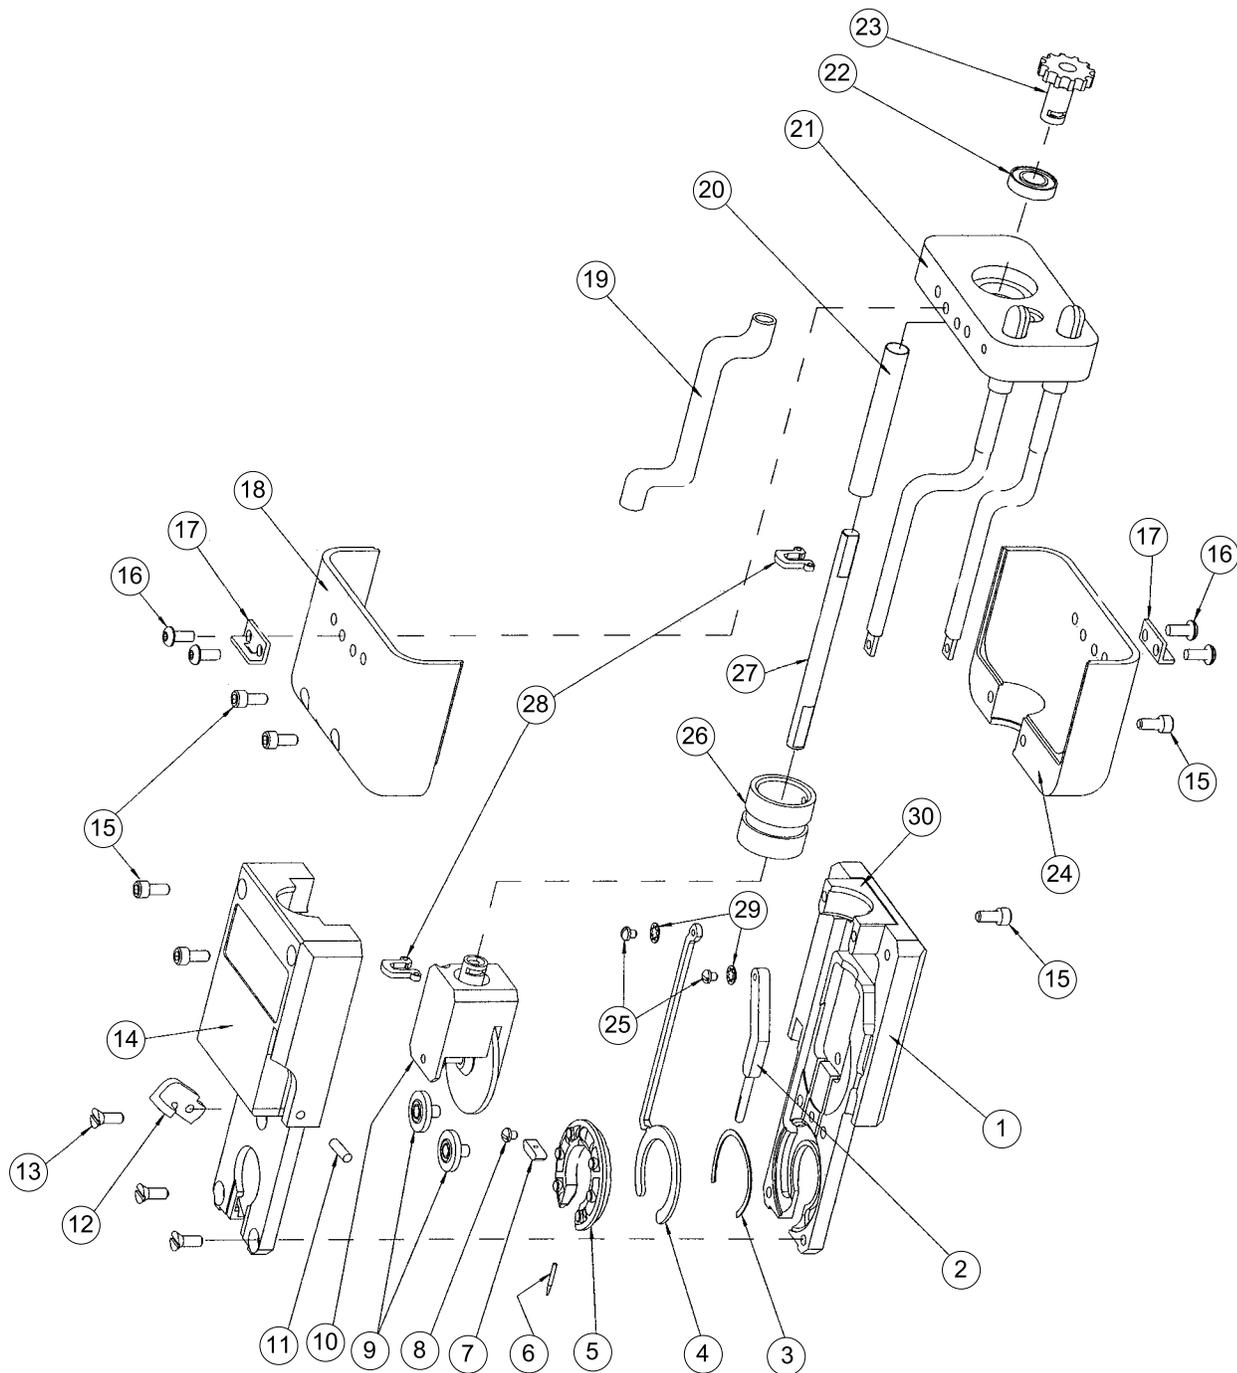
SWS-4MRH-B Rigid Weld Head
